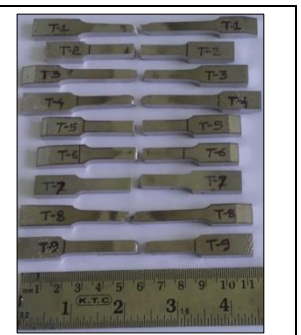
Photograph of Fractured Sample for TIG Weld
